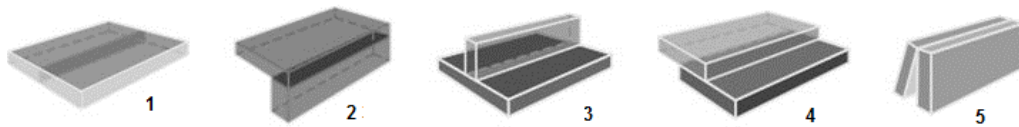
Traditional welding joints as represented by [2]: butt joint (1), corner joint (2), tee joint (3), lap joint (4) and edge joint (5).
